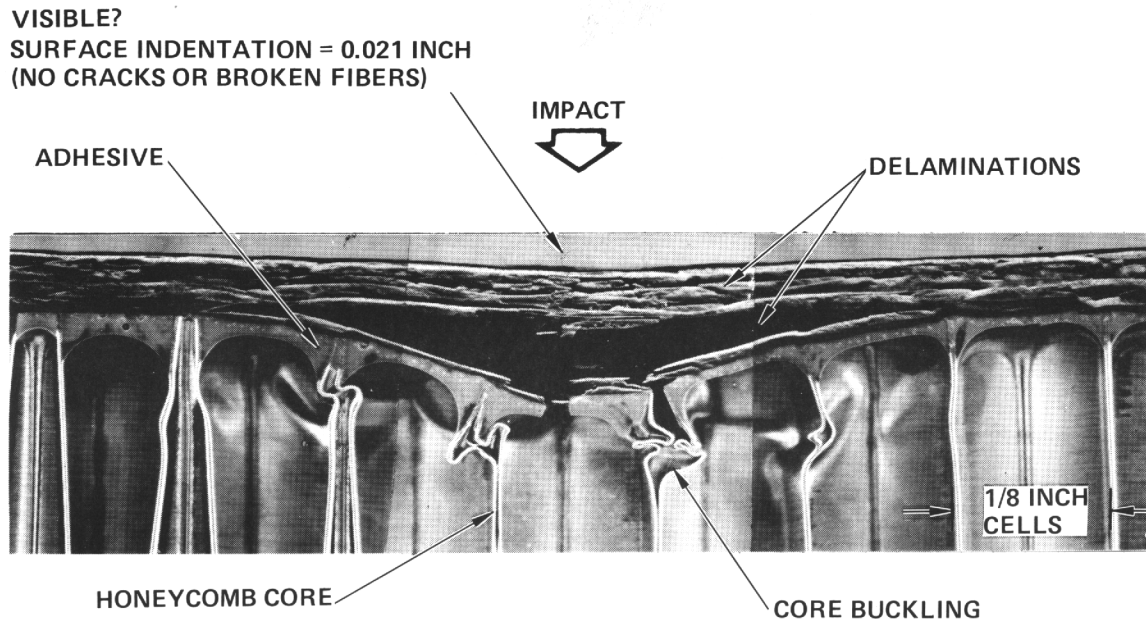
Typical Impact Damage in Sandwich Structure with Composite Face Sheets
